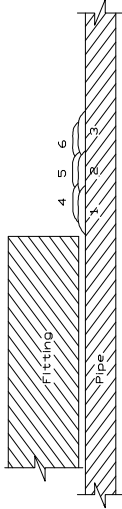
Suggest method of reducing gap between pipe and fitting before welding to fillet throat
